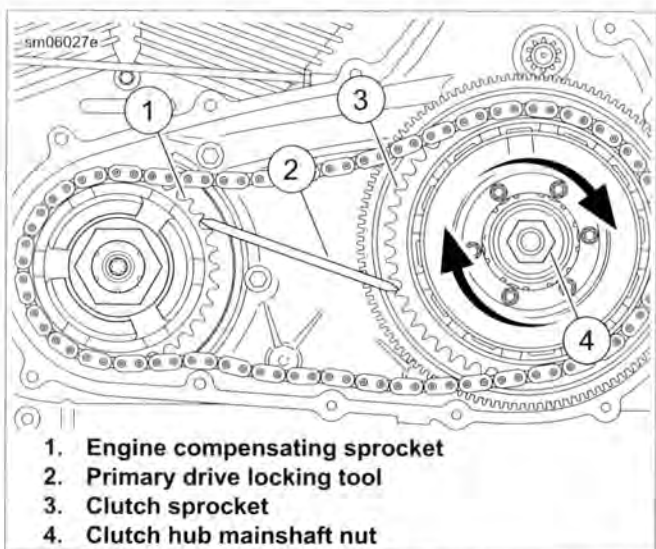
Removing Clutch Hub Mainshaft Nut
